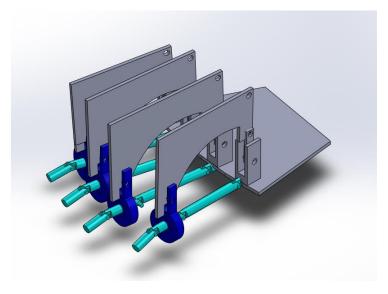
CAD Mockup of Hand Assembly Sans Motors
